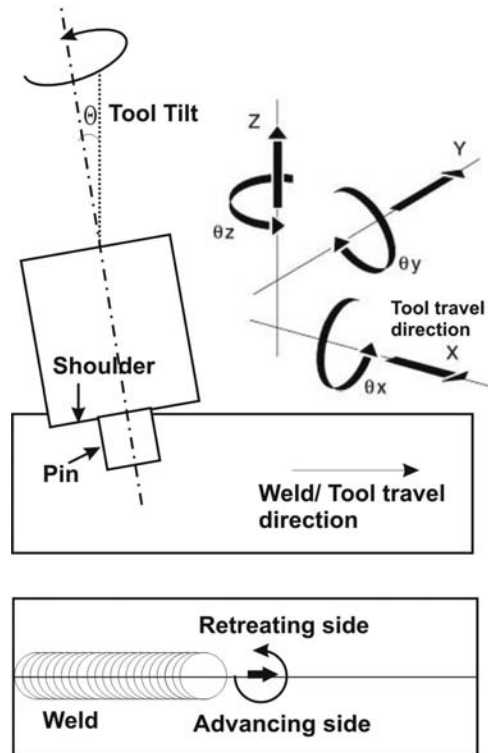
Schematic view of friction stir welding process with nomenclature.
